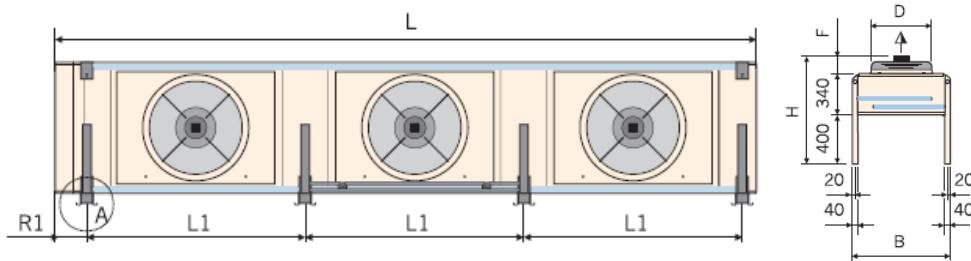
Construction details of the GFH052B/3 dry heat rejection system of the GÜNTNER GmbH (Source www.guenther.de)
